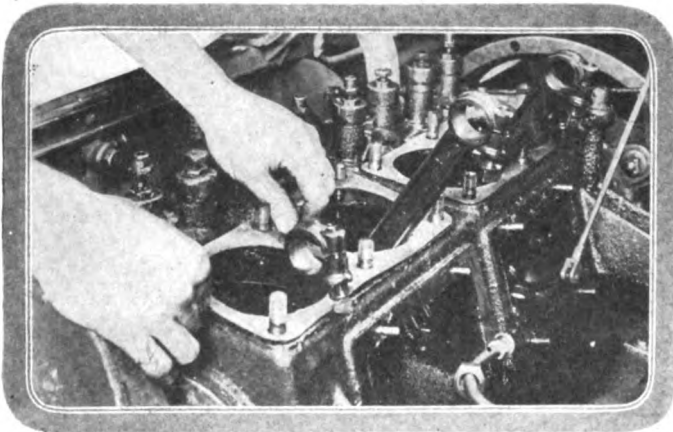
Illustrating method of fitting gasket between cylinder and crankcase castings
